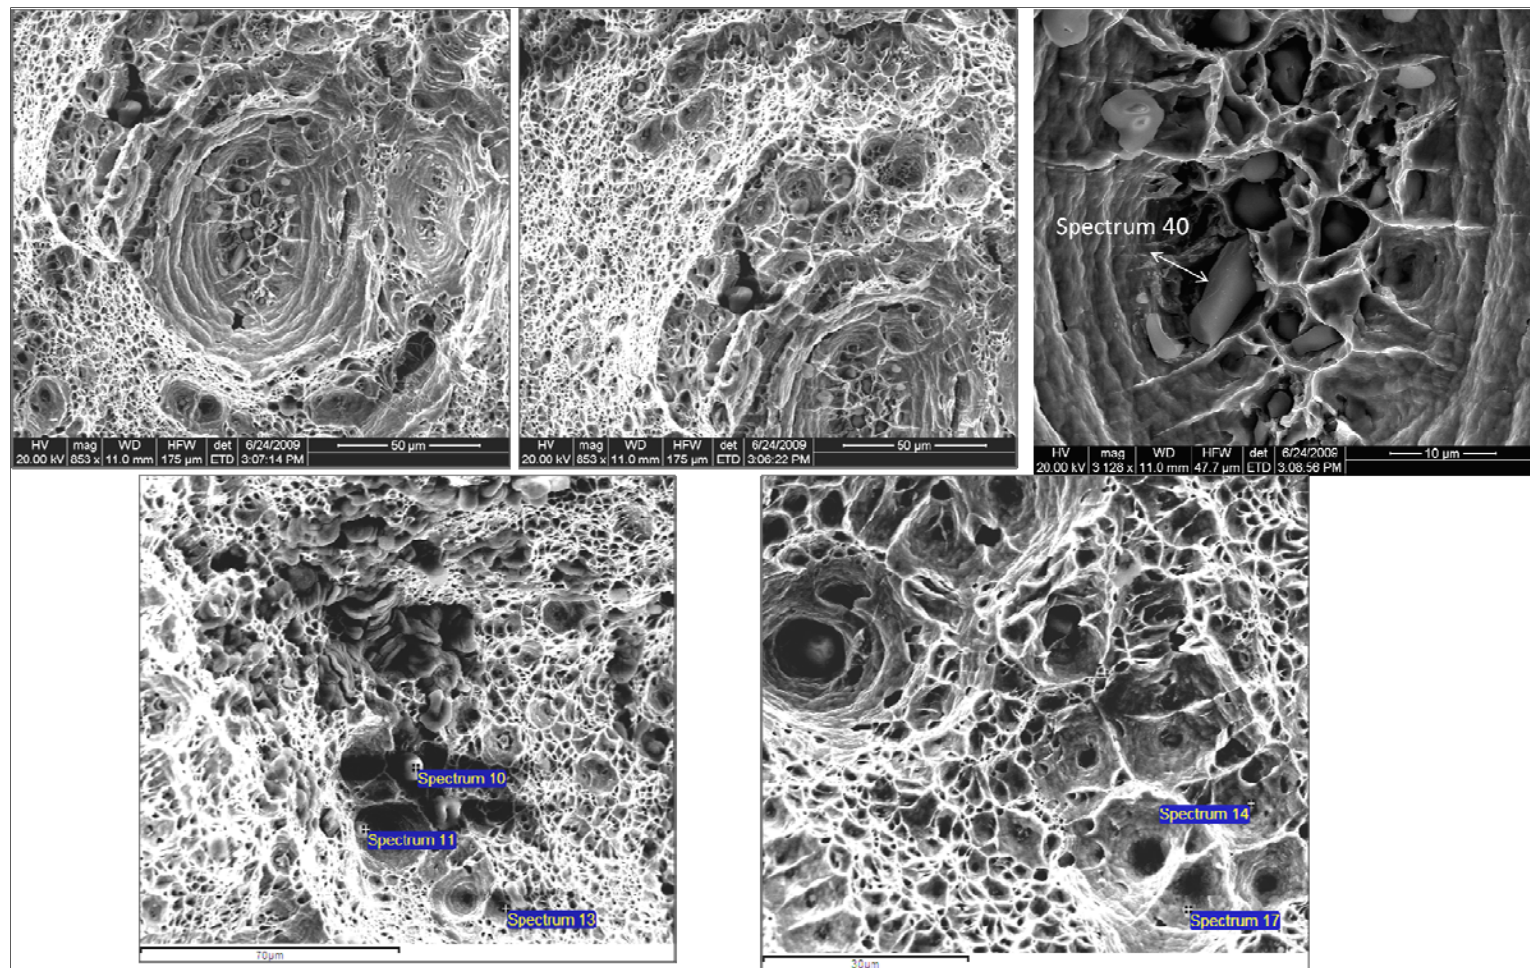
Fracture surfaces taken from the center of the broken shallow notched bar sample 2B2-R.
